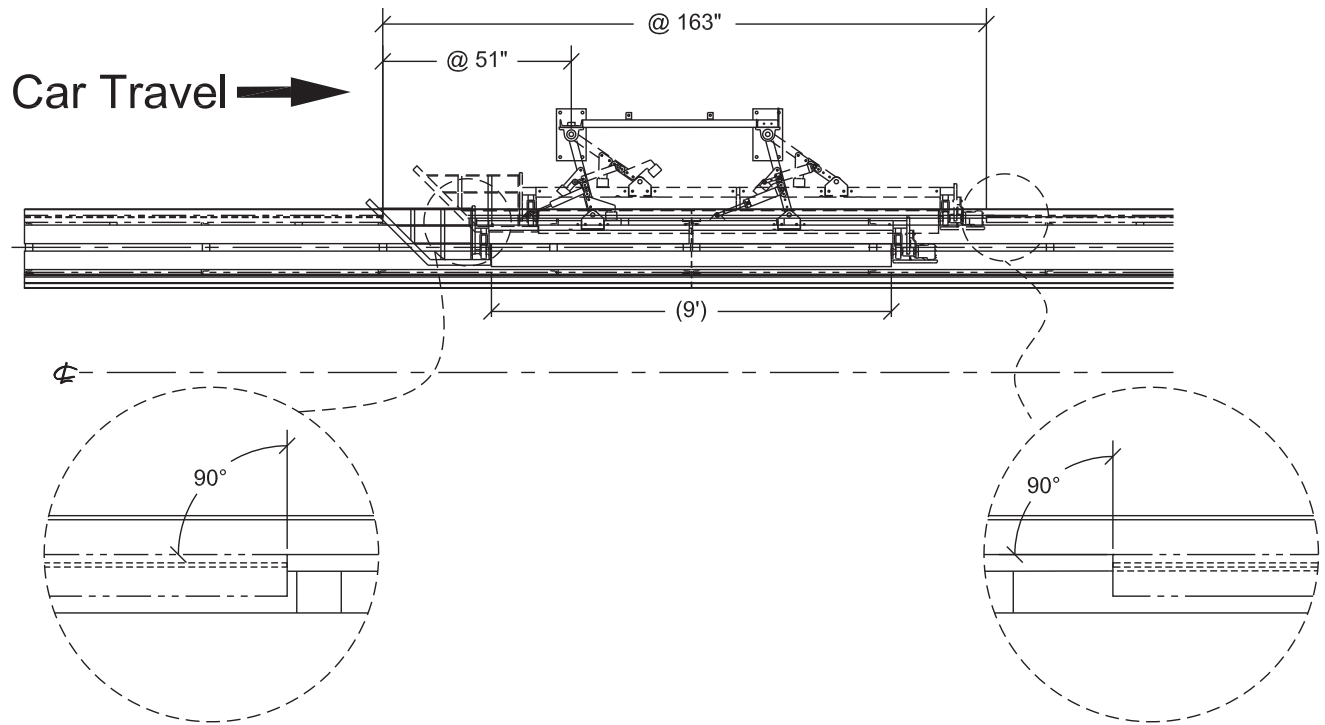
Tire Seal 9 Foot Cut-Out Driver Side
